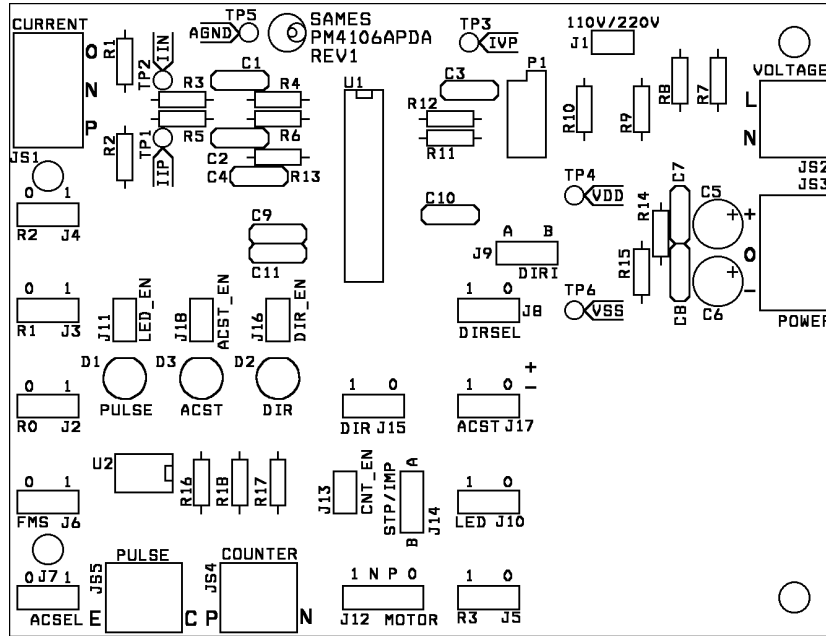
Top silkscreen layer of PCB (scale 1:1)
